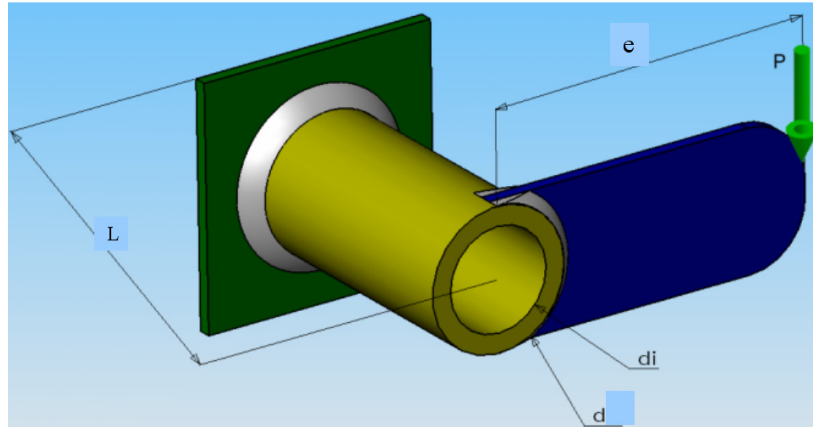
Geometry and loading of a welded tube submitted to a combined loading.
